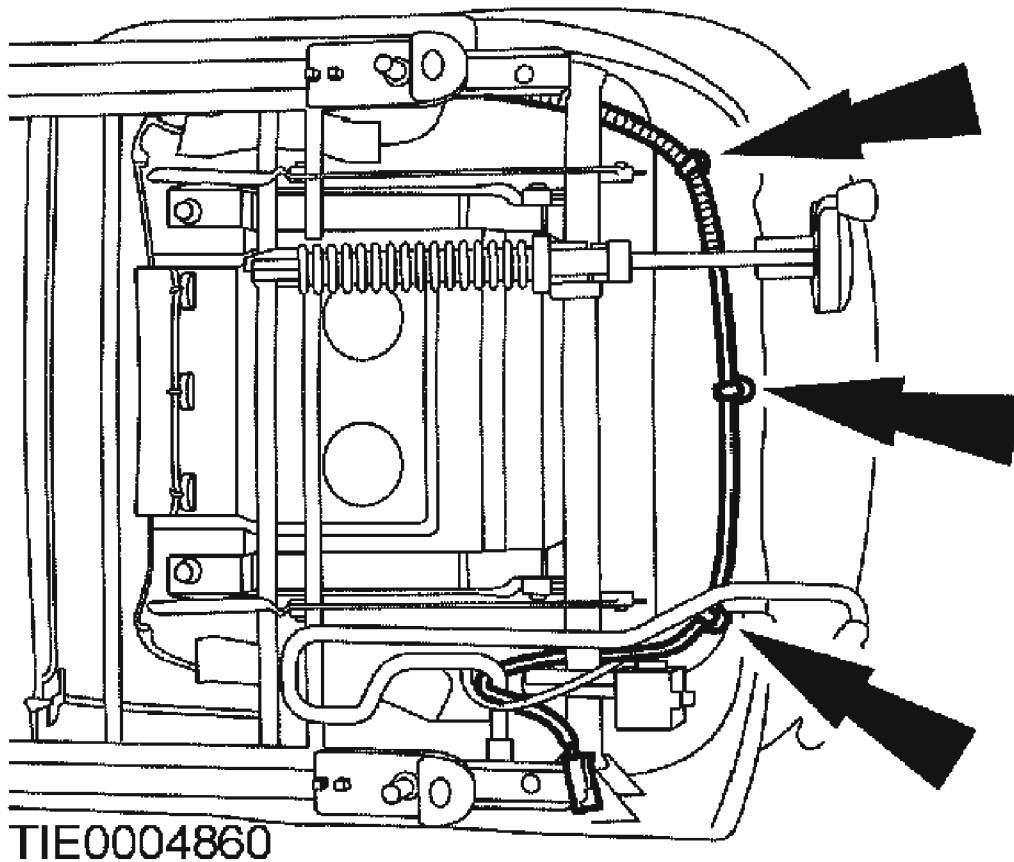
Attaching Safety Belt Buckle Switch Wiring Harness From Underside Of Cushion
